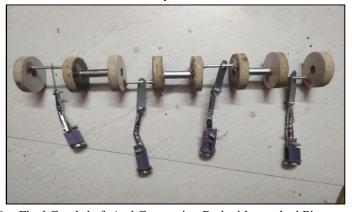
Final Crankshaft And Connecting Rod with attached Piston assembly.
